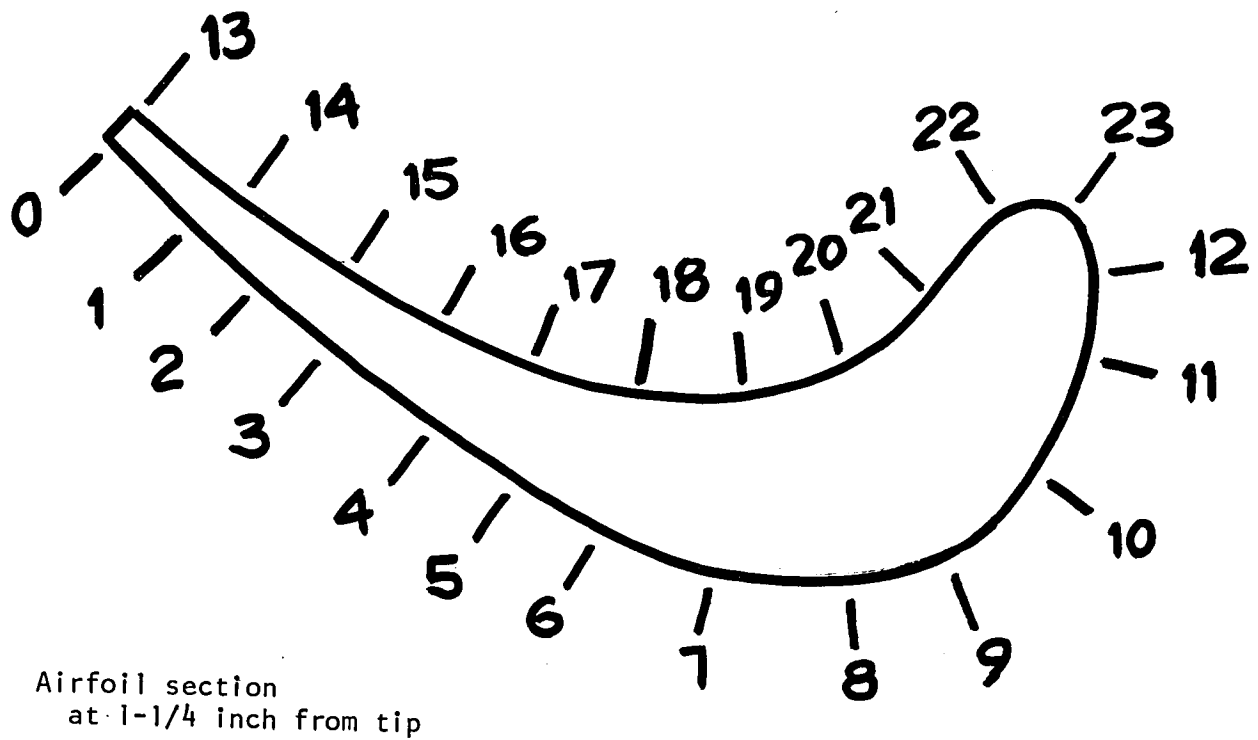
First Modified Measurement Locations on JT9D First Stage Blade Airfoil Section.
